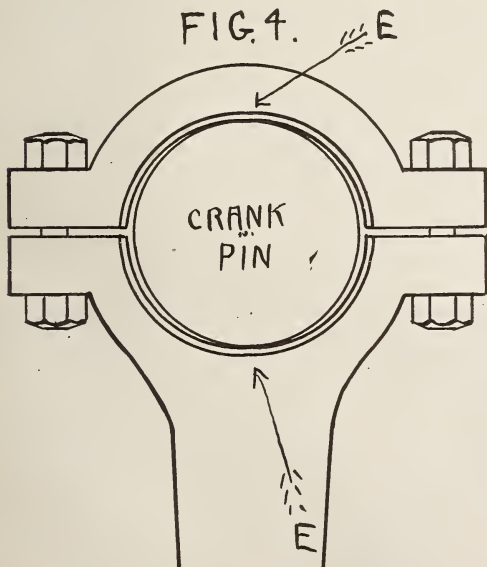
This shows how both cap bearing and connecting rod bearing may be sprung by tightening nuts too tight while taking readings. When bearings are tightened in this manner, points E are tighter on shaft than sides of bearings.
